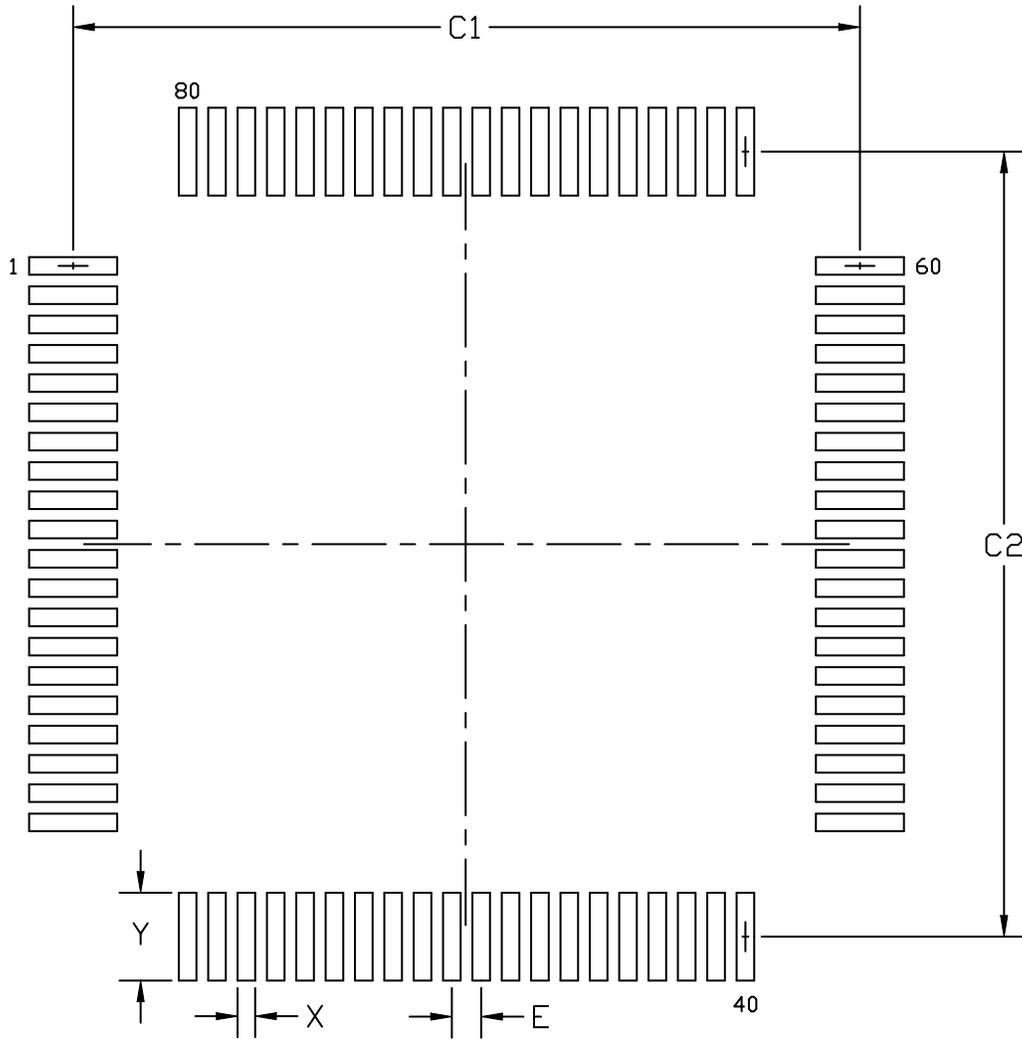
TQFP80 PCB Land Pattern Drawing
